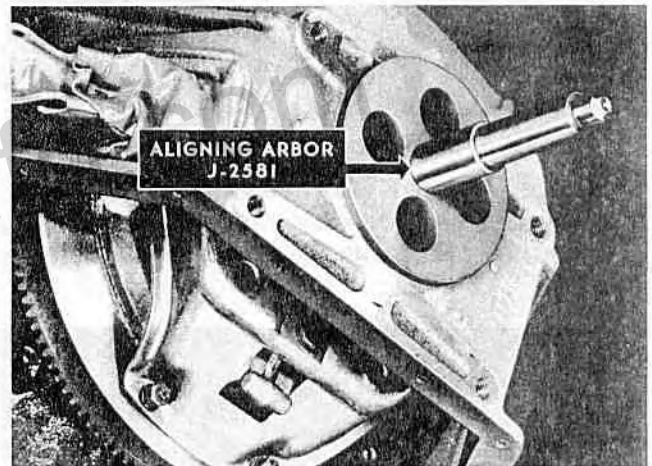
Aligning the Clutch Driven Plate Using Aligning Arbor
